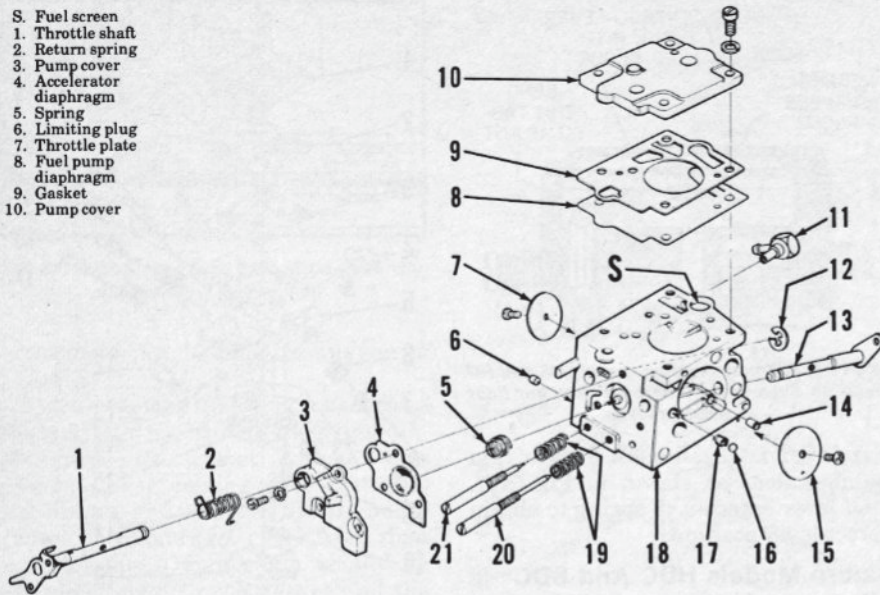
Exploded view of Walbro model SDC carburetor with accelerator pump assembly. Refer to Fig. S21 for metering diaphragm assembly.
